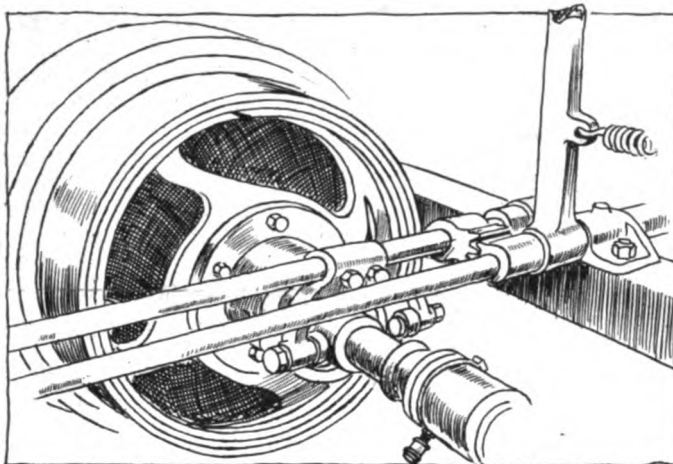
Clutch and brake rod intermeshed on D. P. F.
